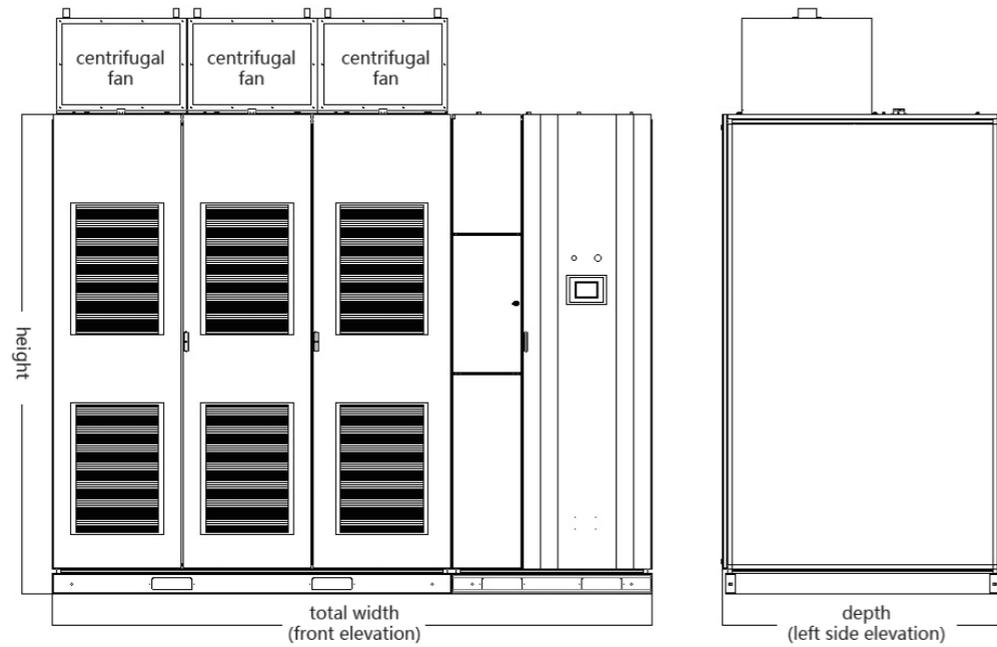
Dimensional Drawing of G31-10kV-Indoor-Air Cooling FGSVG-C6.0/10
